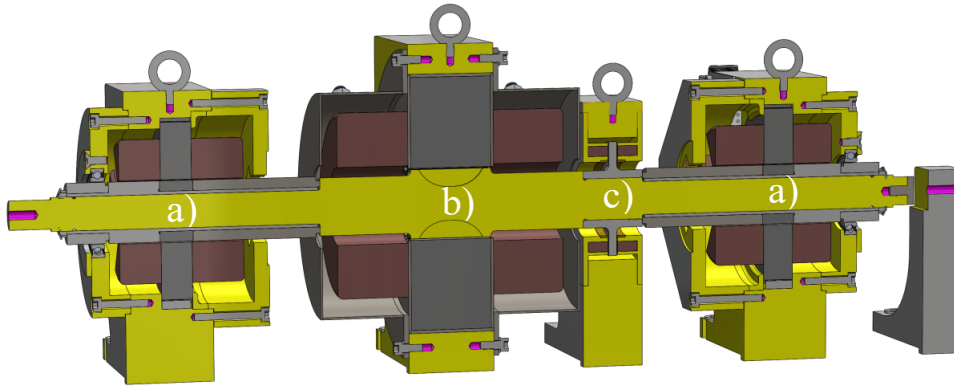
Example of an AMB rotor system. a) Radial magnetic bearings, b) solid-rotor induction machine, and c) axial magnetic bearing.
